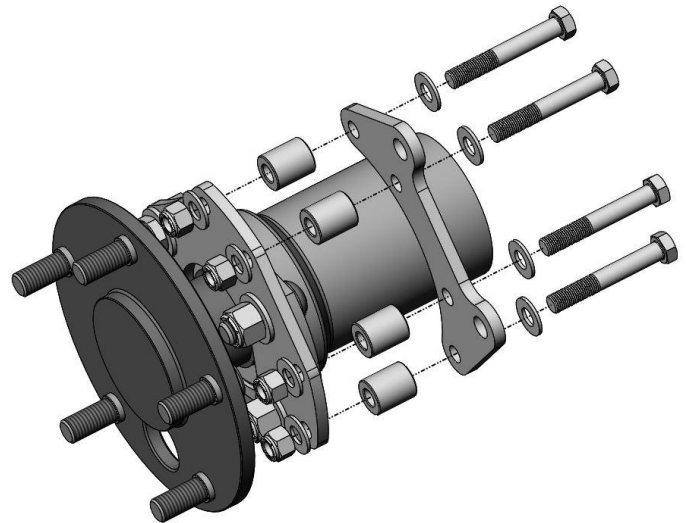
Caliper Mounting Bracket Installation (2.375" Standoff)
